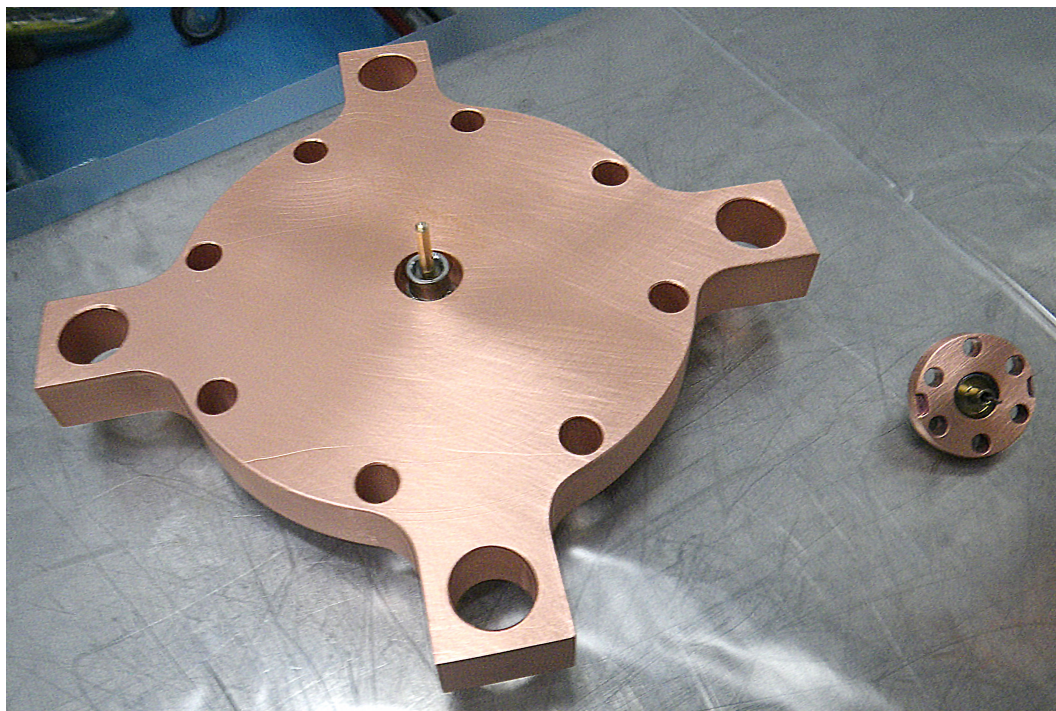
Completed forward power (left) and transmitted power (right) coupler flange assemblies.
